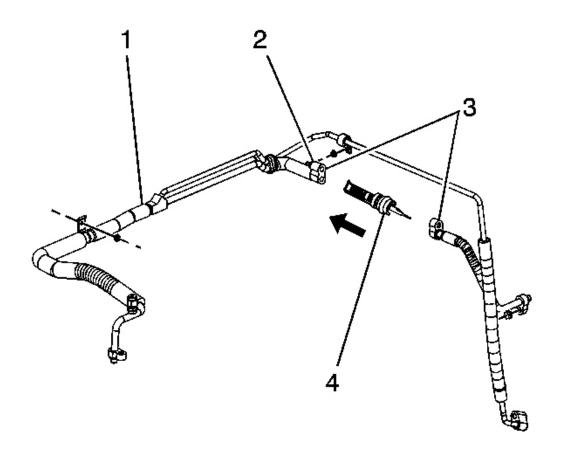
Removing/Installing Expansion Tube Courtesy of GENERAL MOTORS CORP.
